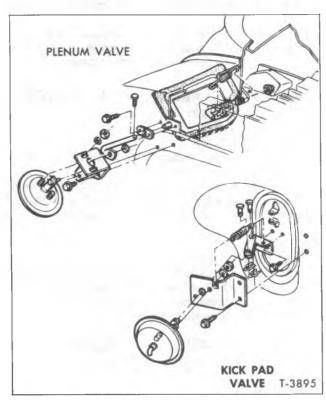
Air Inlet Valve and Recirculating Air Valve
